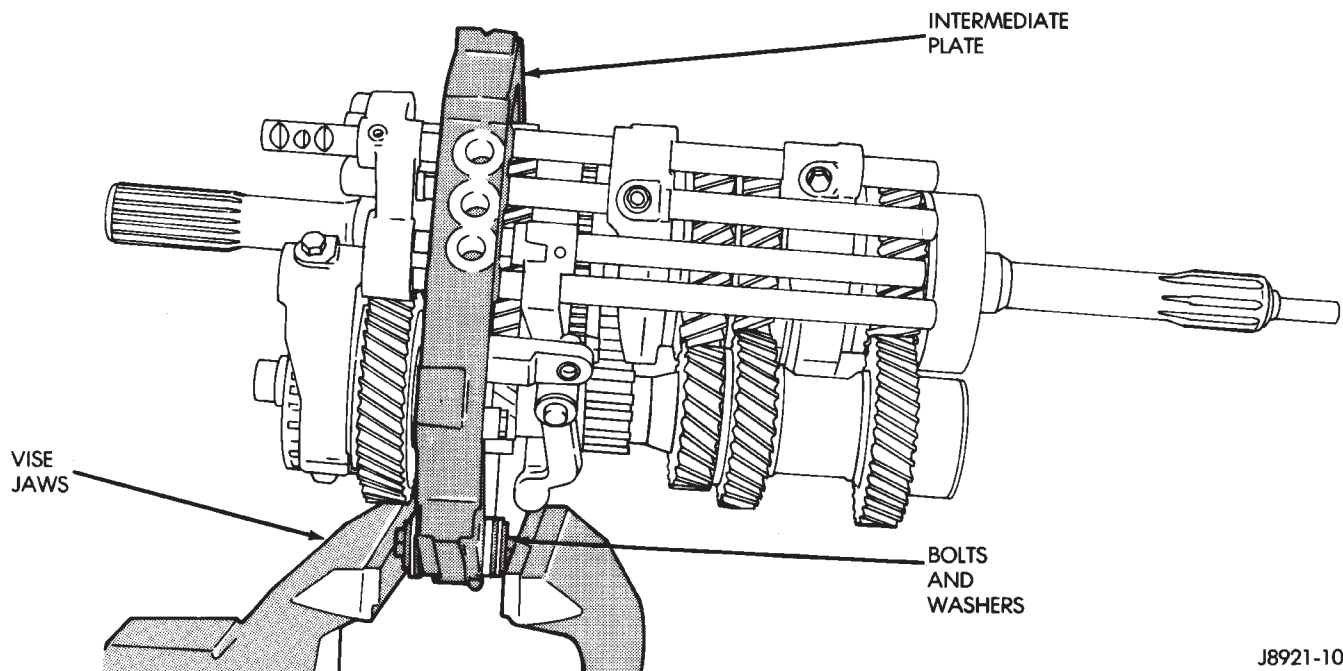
Mounting Intermediate Plate And Geartrain In Vise
